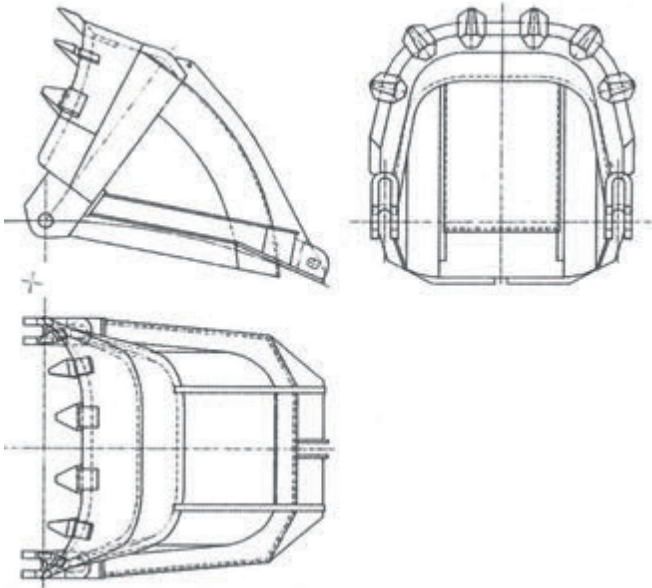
Bucket for hard mineable soils in BWEs: KWK 1500, KWK 1200, SchRs 1200 at lignite open pit mine Turów [8]
